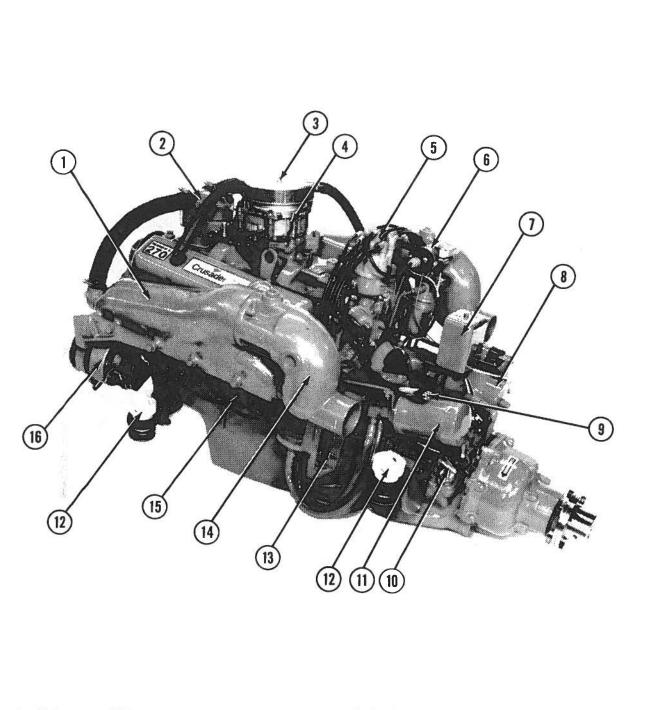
Typical V-6 Engine - Starboard "Right" View
